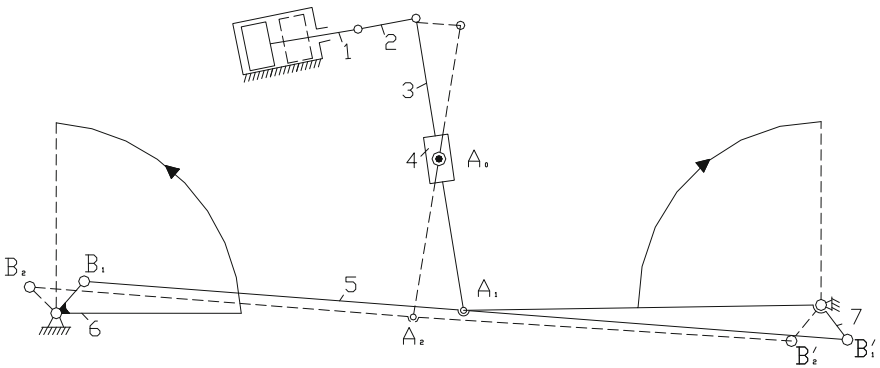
Double-triad kinematic scheme of the door actuating mechanism
